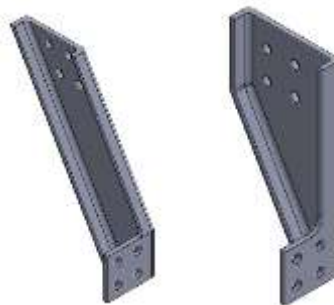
Models of carrier bridge used with (C-section beam) truck chassis
